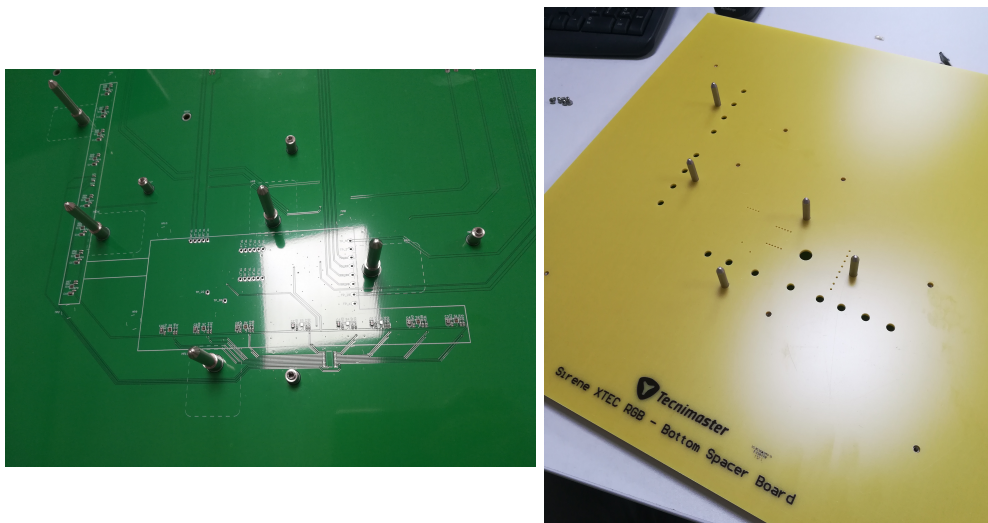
Mechanical components assembled on the left and BCB and BSP assembled on the right
